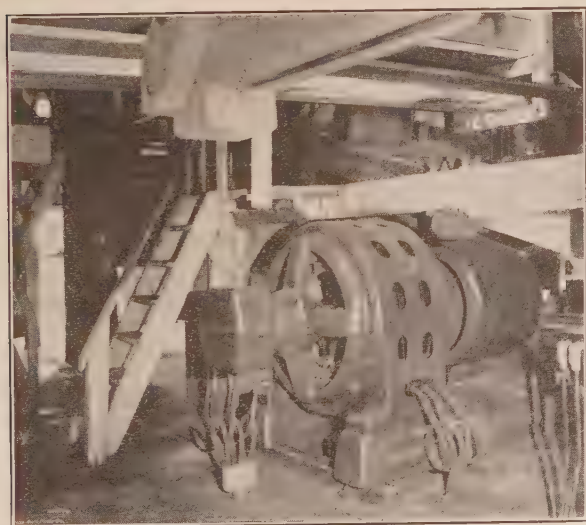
300-H. P. 3-BEARING INDUCTION MOTOR EQUIPPED WITH ENCLOSED COLLECTOR RINGS DRIVING 11-FT. BAND MILL
